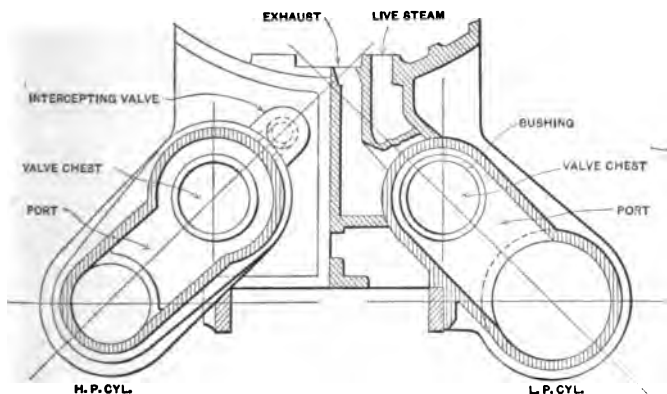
SECTION THROUGH CYLINDERS AND VALVE-CHESTS. EXHAUST AND STEAM PASSAGES, BROOKS TANDEM COMPOUND.
